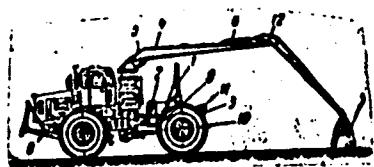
1 - pick-up assembly; 2 - hoist;
